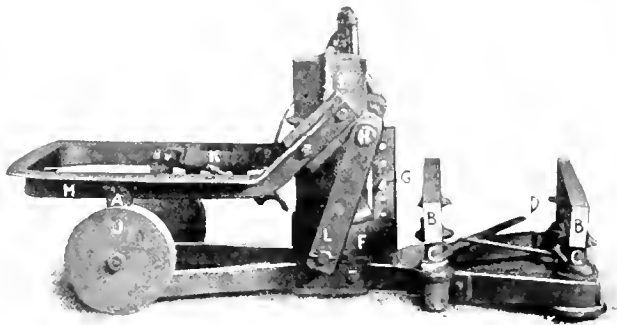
Farwell Portable Pneumatic Roll-over Molding Machine
